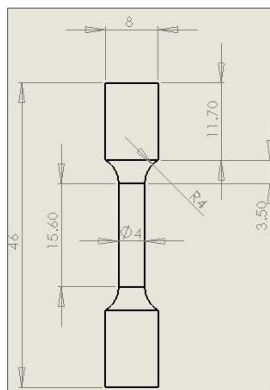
A schematic showing the dimensions of the smooth bar samples that machined from 8 mm diameter cylinders.
